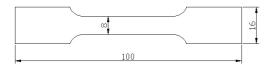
Mold dimensions of tensile test specimen (thickness = 4mm).
